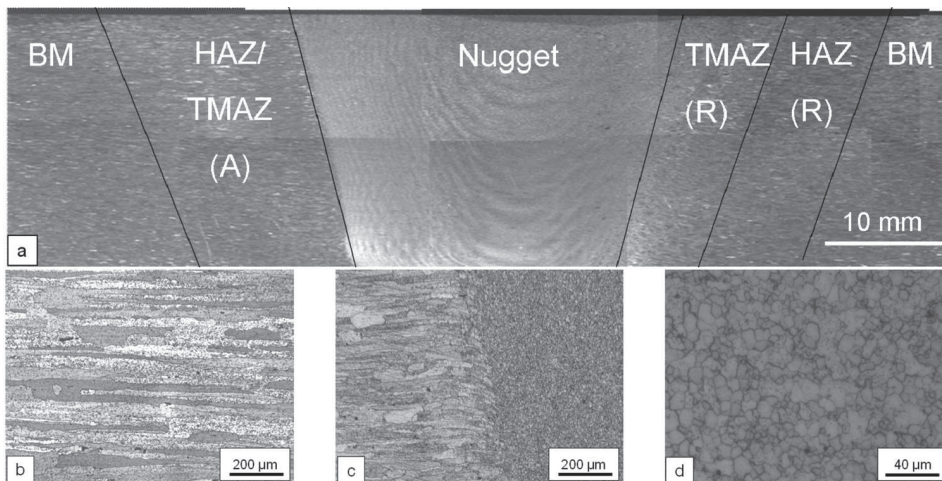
Optical observations after etching with Keller's solution of (a) a welded joint of 2050-T3 alloy submitted to a T8 post-welding heat treatment. Zoom on (b) the base metal (c) the TMAZ and (d) the nugget. (A) advancing side, (R) retreating side.
